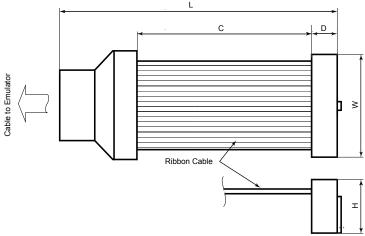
Top and side views of the 20-pin ARM probe with a cable extender. L = 69 mm (2.7 in.), C = 40.0 mm (1.55 in) D = 6.0 mm (.24), W = 30.0 mm (1.2 in.), H = 11.5 mm (0.45 in.).
